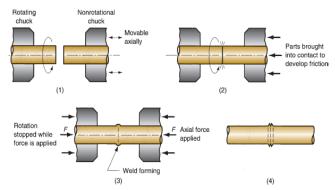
Rotary Friction Welding Process (Groover, M.P. 2013)
